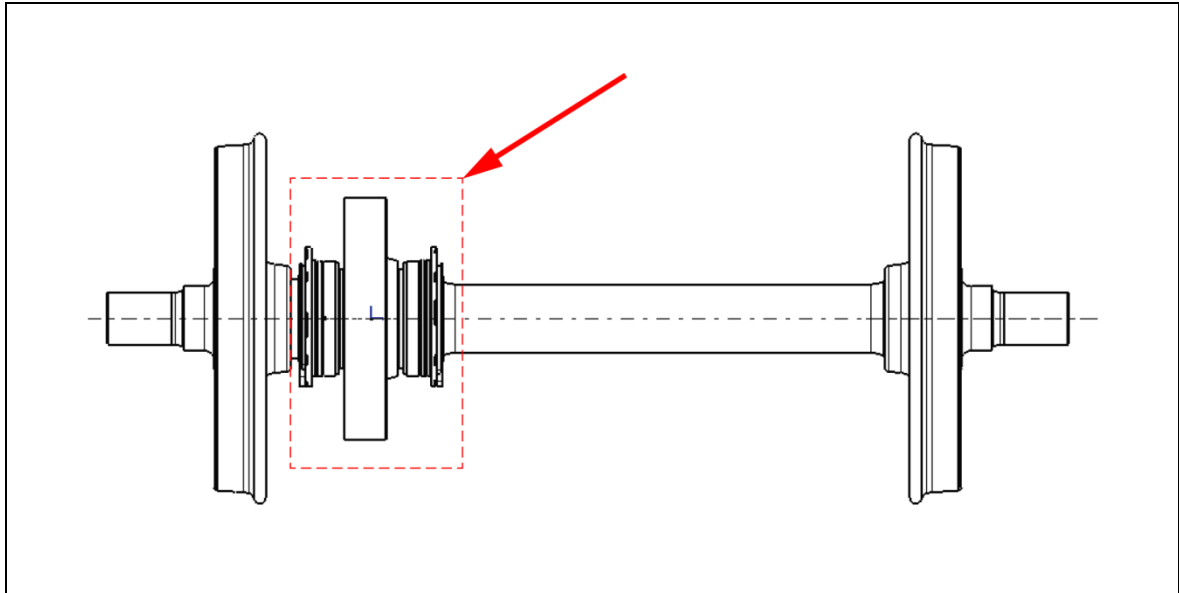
Protecting dismantled wheelset shaft with drive wheel
